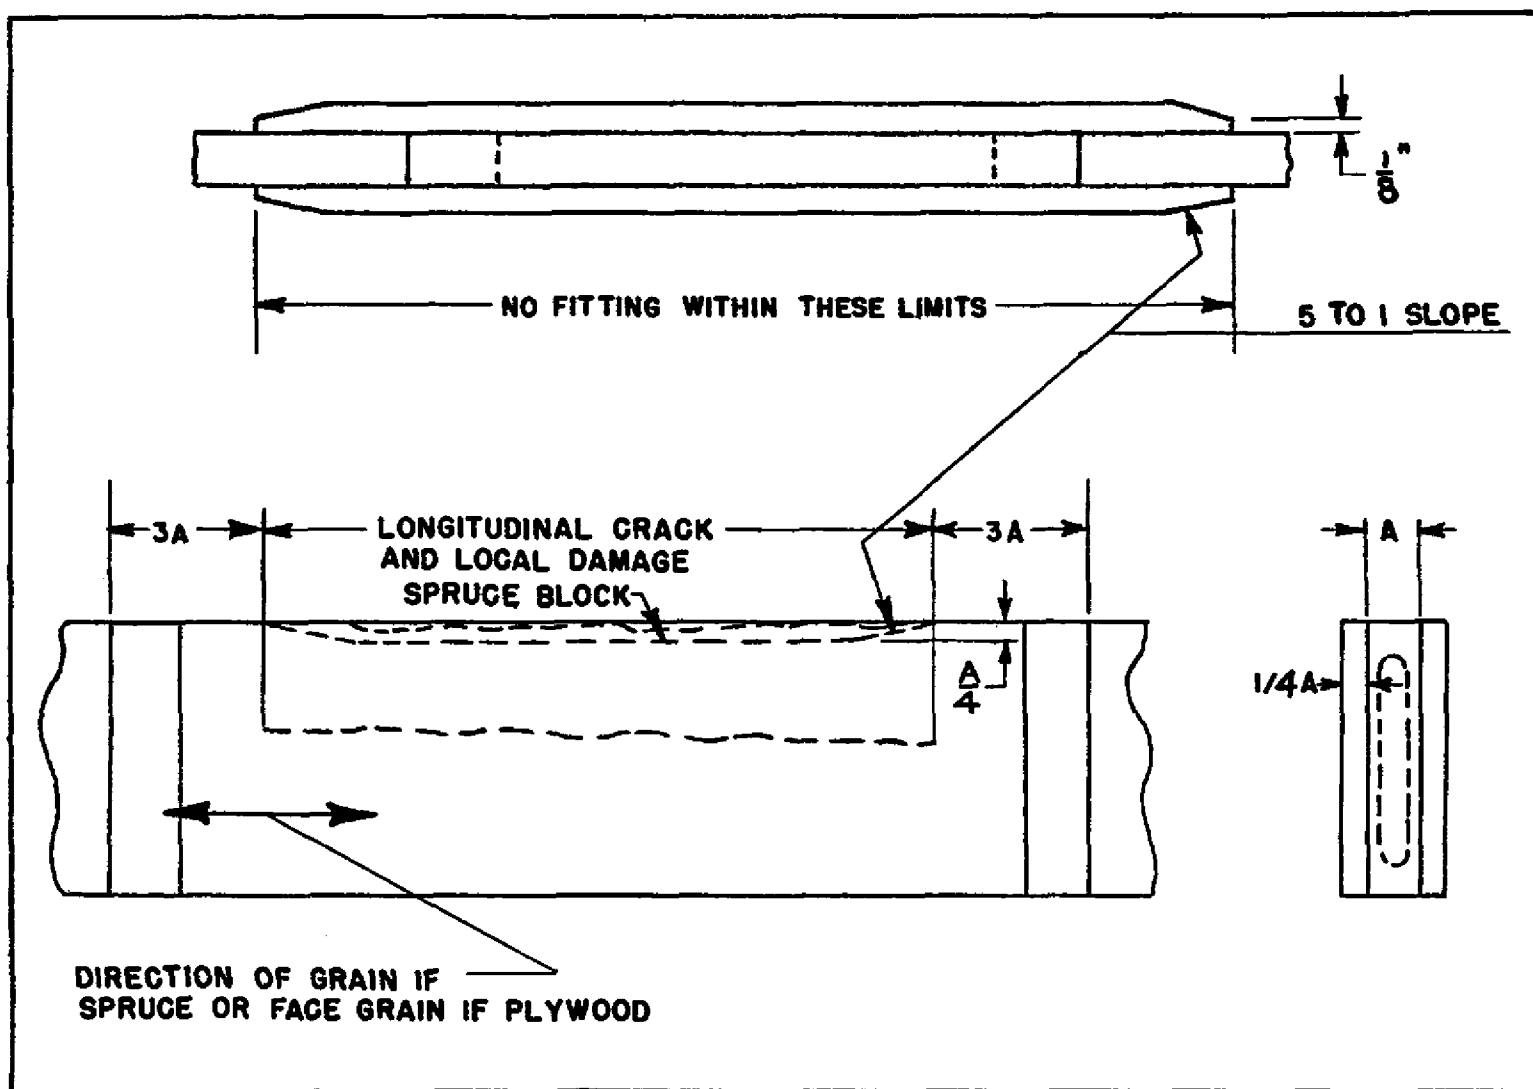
Method of reinforcing a longitudinal crack and/or local damage in a solid or internally routed spar.
